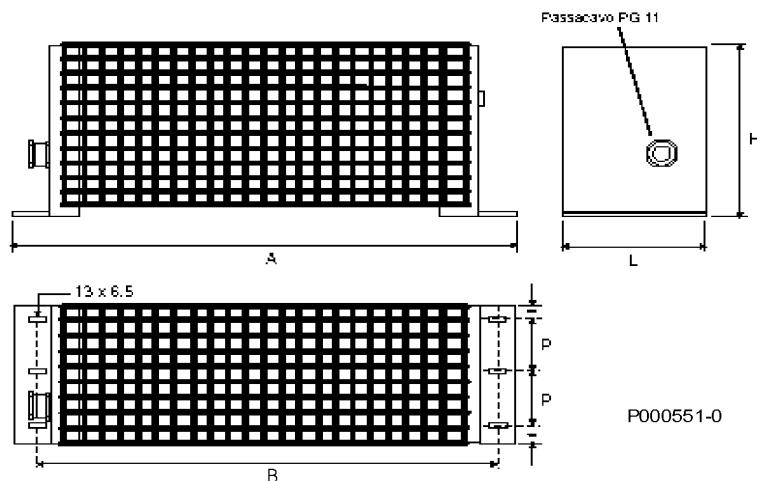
Overall dimensions, 4 kW, 8 kW and 12 kW braking resistors
